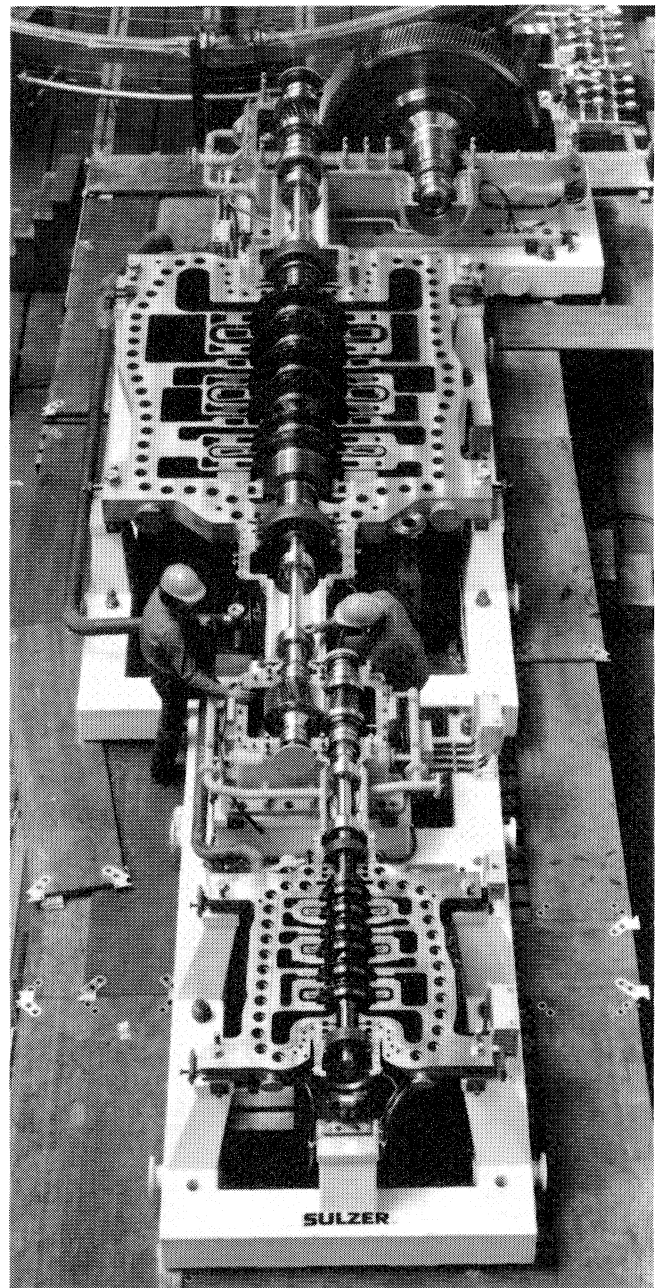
Motor/Gear-Driven Compressor Train: motor/gear coupling/gear with low speed thrust bearing/pinion/solid coupling/LP-compressor/solid coupling/gear/solid coupling/HP compressor.
